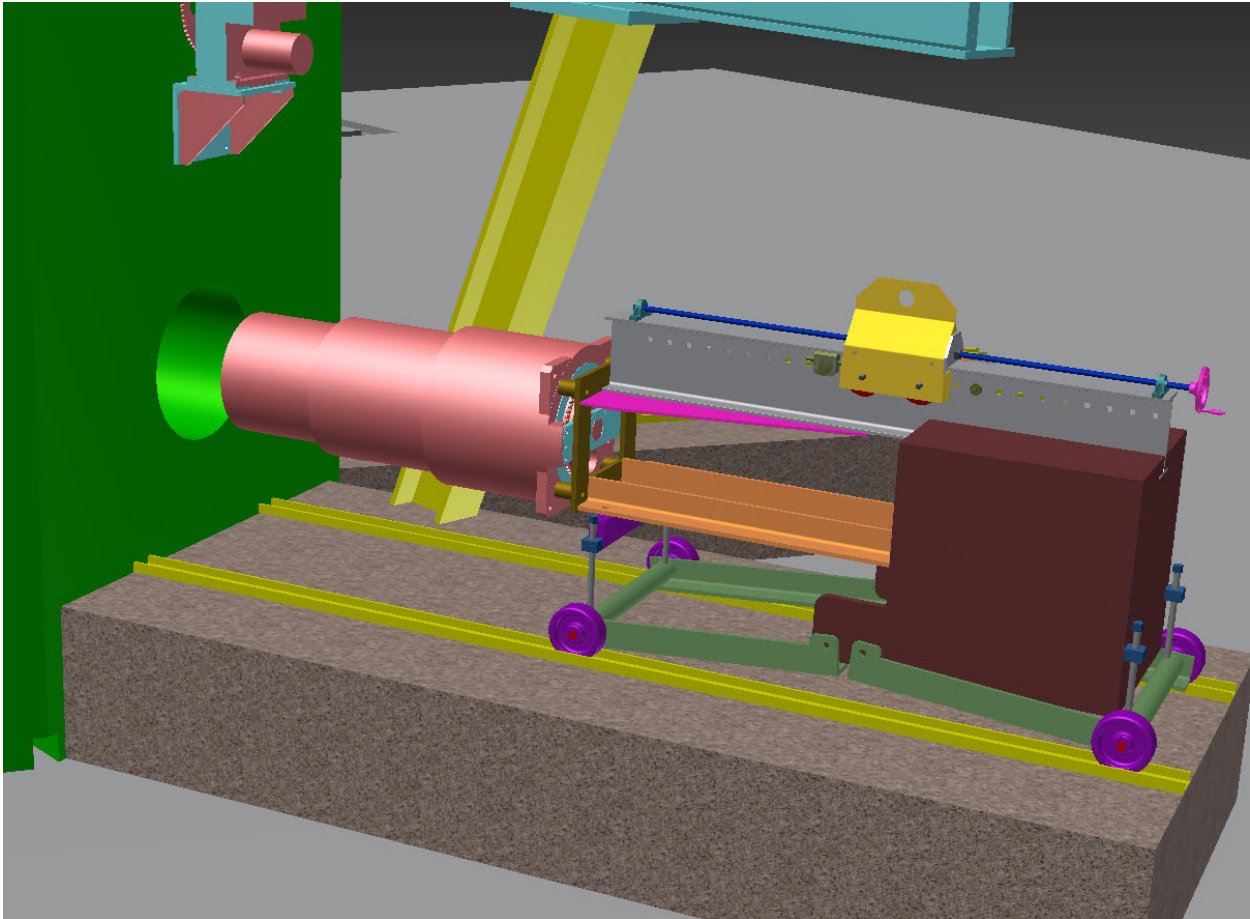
Shutter counterbalance tool shown inserting a shutter into a shutter cavity.
